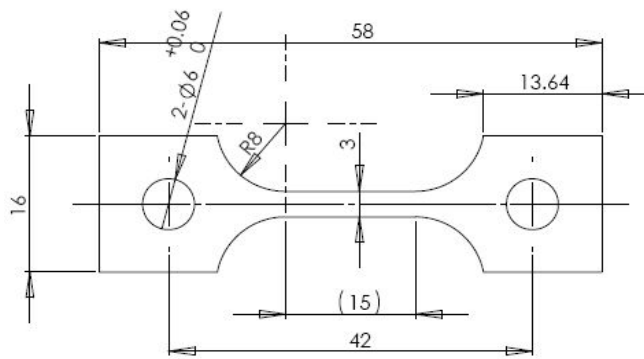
Schematic view of SSRT specimen (dimensions in mm)
